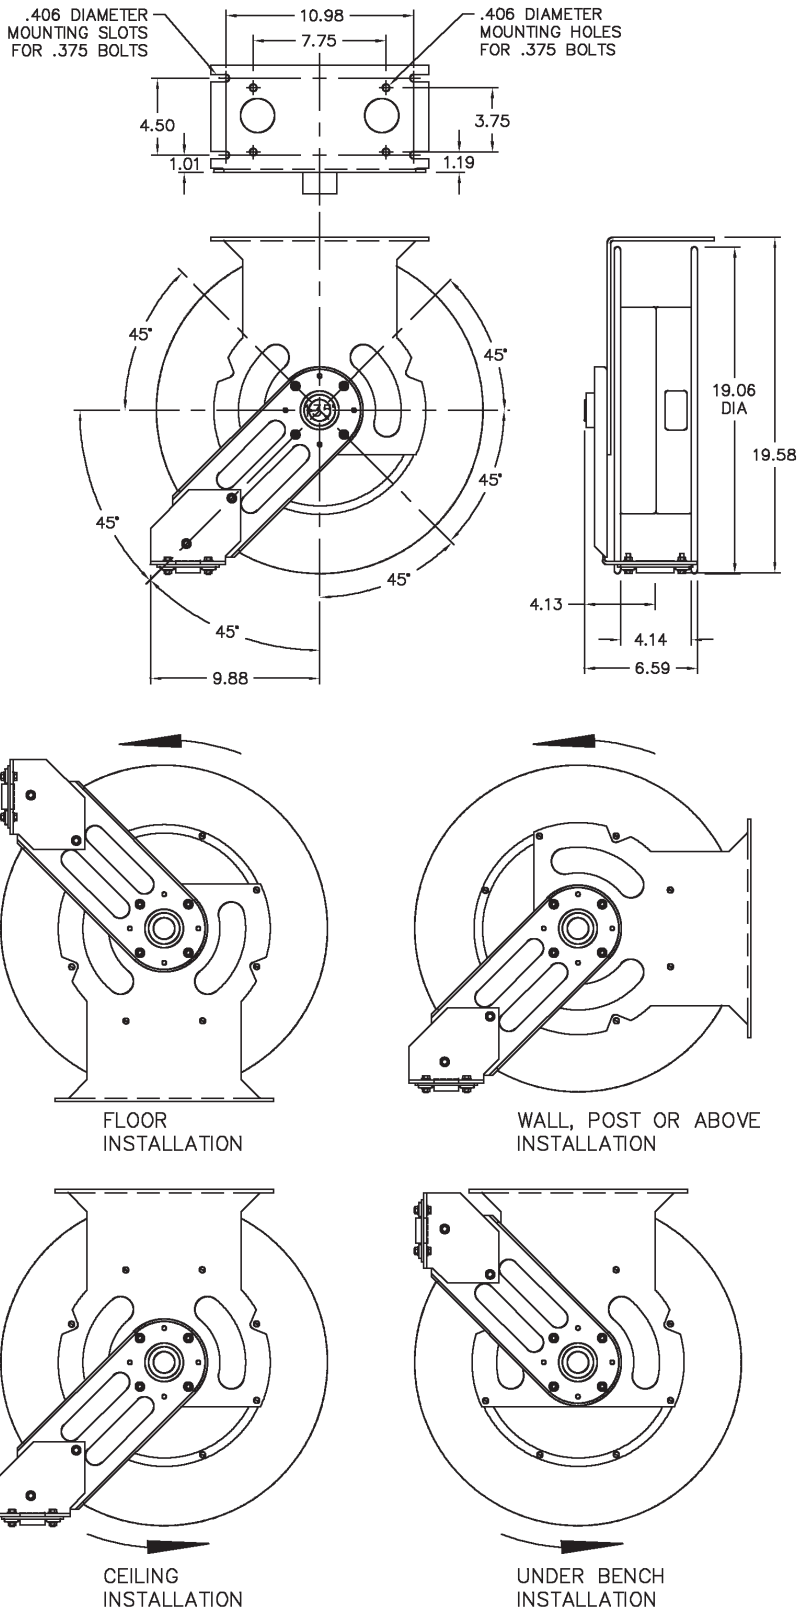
REEL INSTALLATION AND ADJUSTMENT
